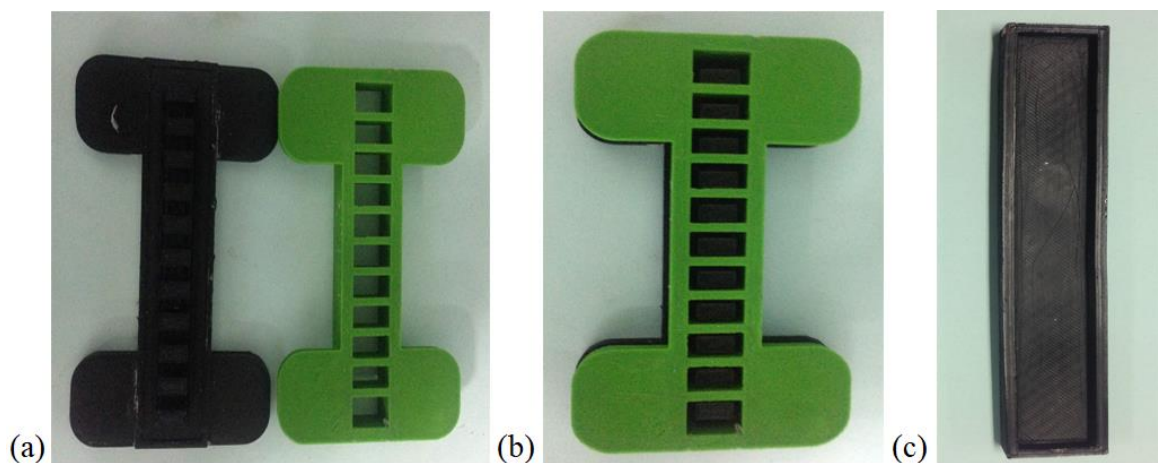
3D printed molds for fabrication of pneumatic actuators: (a) upper and lower molds (b) upper and lower molds fitted together (c) Base mold.
